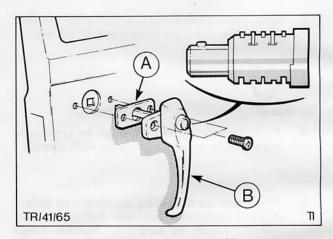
Exterior handle and cylinder assembly A - Mounting pad B - Handle
